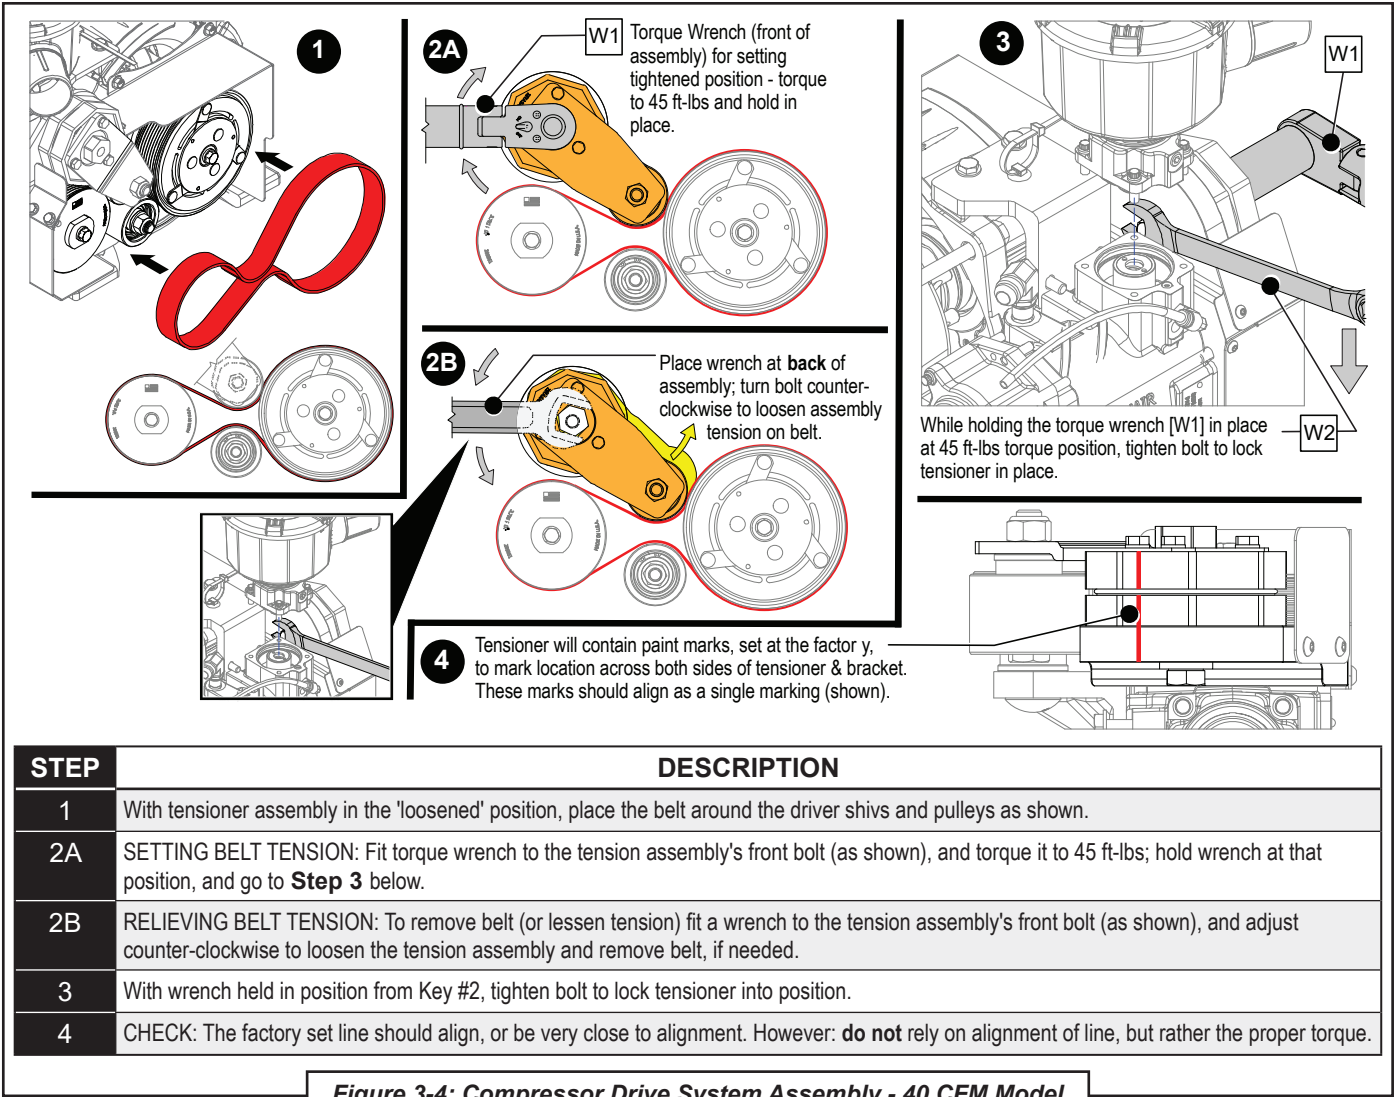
Compressor Drive System Assembly - 40 CFM Model
